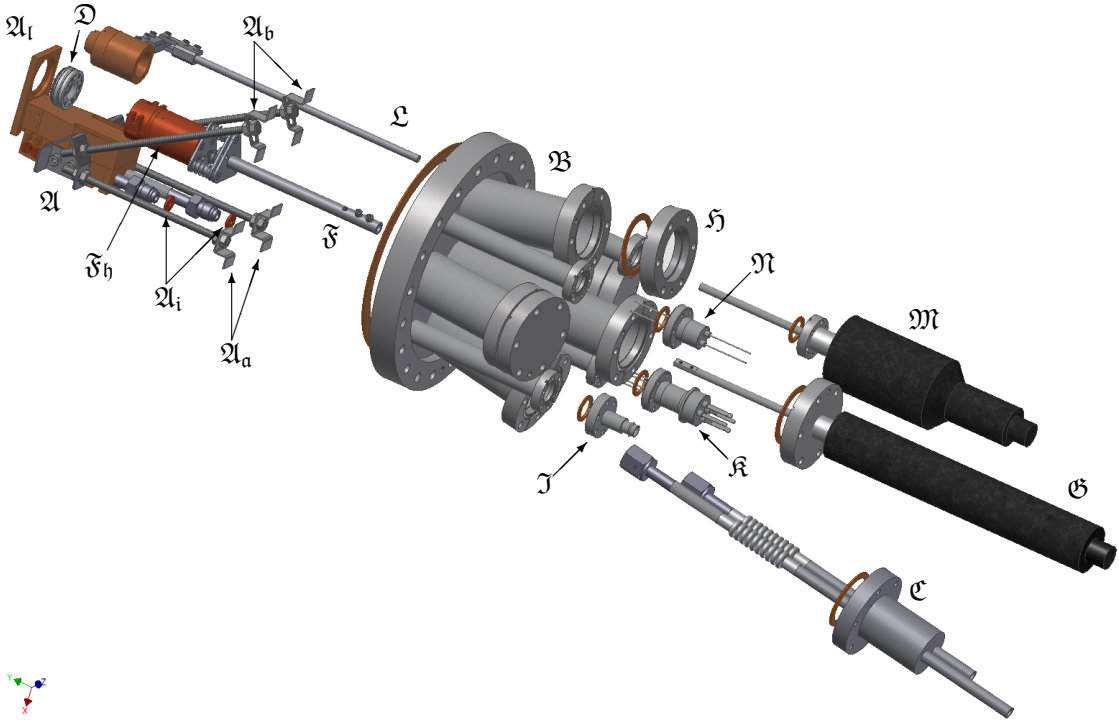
Assembly of the Detector Stage — The fixtures (\mathcal{A}_a , \mathcal{A}_b) of the thermal reservoir (\mathcal{A} , Figure 2.5) is welded to the vacuum side of the base flange (\mathcal{B}) and connected with custom copper gaskets (\mathcal{A}_i) to fluid feedthroughs on a 40CF flange (\mathcal{C}) for an external heating/cooling system (not shown). The sample holder (\mathcal{D} , Figures 2.2 or 2.3) is inserted into the sled on the reservoir (\mathcal{G}). The detector mount (\mathcal{F} , Figure 2.9) with its actuator^a and detector head (\mathcal{F}_h , Figures 2.6 and 2.7) are fixed on the central 40CF flange. A 40CF window (\mathcal{H}) is mounted opposite to the thermostat feedthrough (\mathcal{C}). The other 40CF flanges are sealed by blind flanges. A BNC^b (\mathcal{J}) and a twin Type K thermocouple feedthrough^c (\mathcal{K}) are mounted close to the thermostat feedthrough (\mathcal{C}). The remaining 16CF flanges carry the heater assembly (\mathcal{L} , Figure 2.8) with its actuator^d (\mathcal{J}) and its power feedthrough^e (\mathcal{M}).
